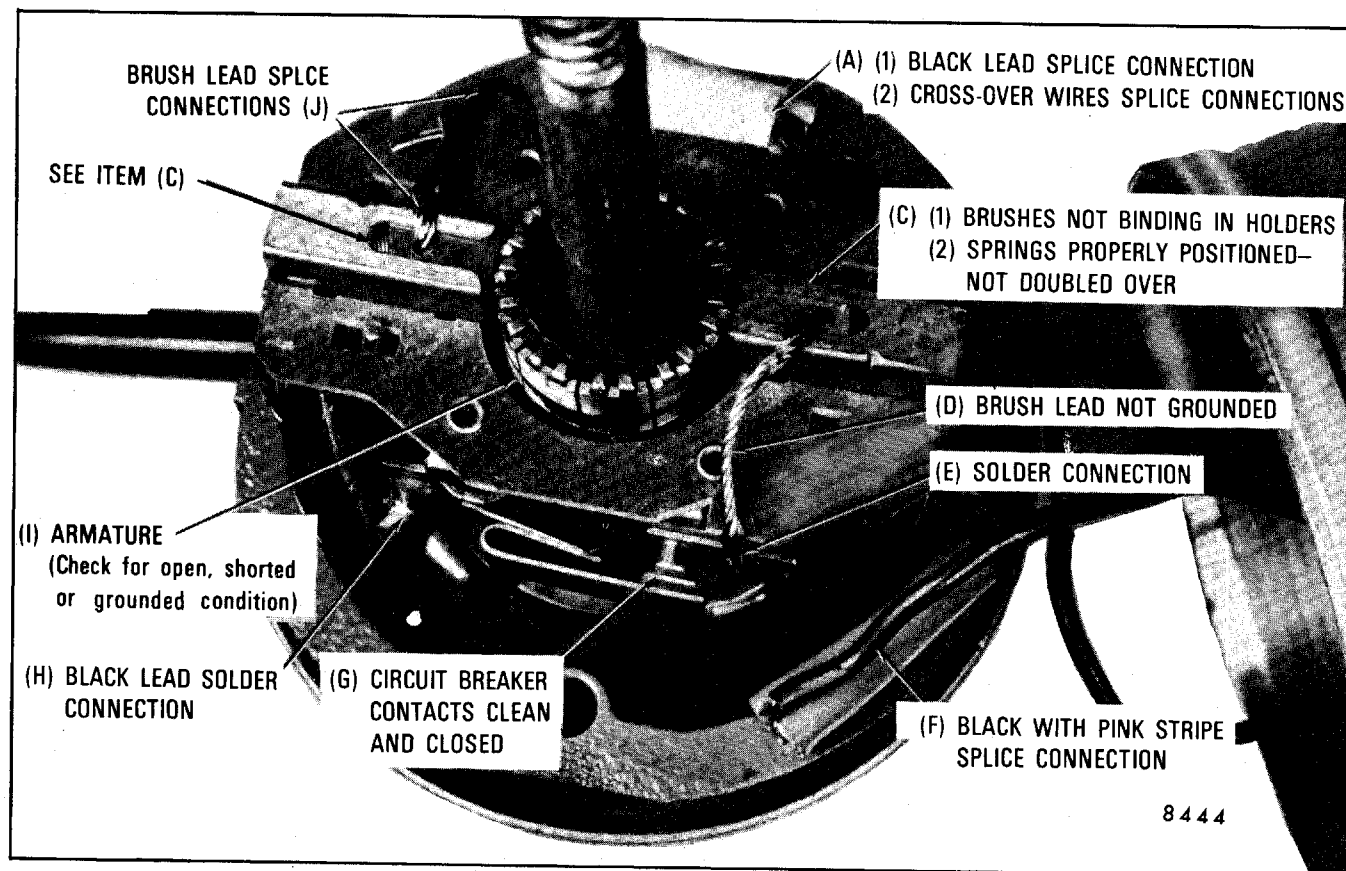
Visual Inspection Modified Pulse Motor
